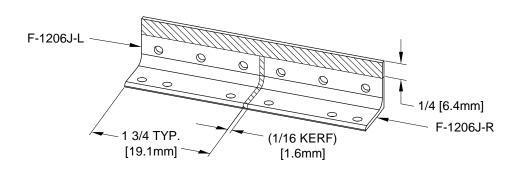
SEPARATING AND TRIMMING F-1206J
